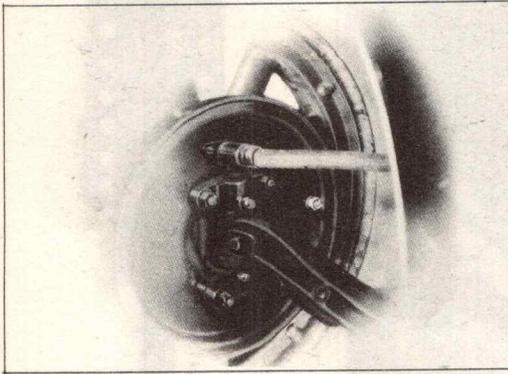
Brake Adjuster Stop Retaining Screw
